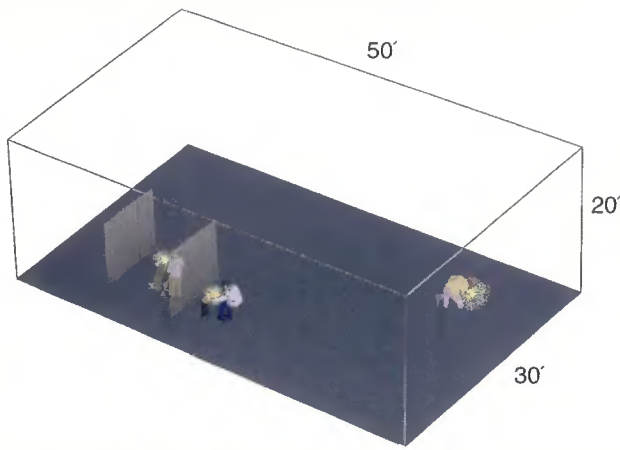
A 30,000-sq-ft enclosed welding space. Dilution air assumes continuous welding without the use of air pollution collection devices.
